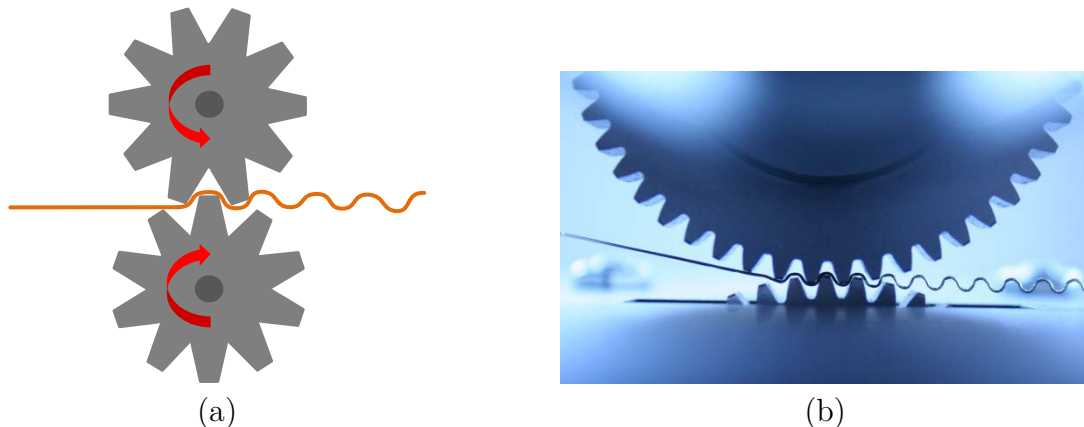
Wave-shaping with Method 3: (a) schematic drawing and (b) photograph of the wire deformation using 2 toothed wheels.
